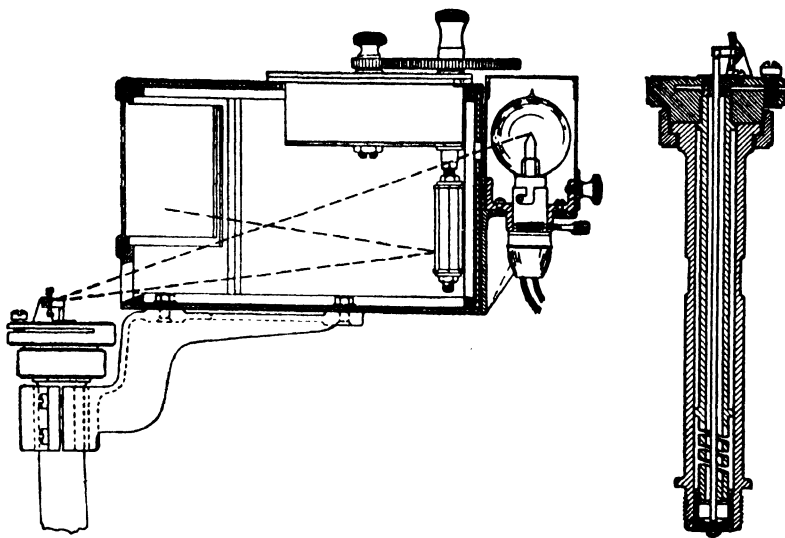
The Midgeley indicator, showing pressure element on right.
